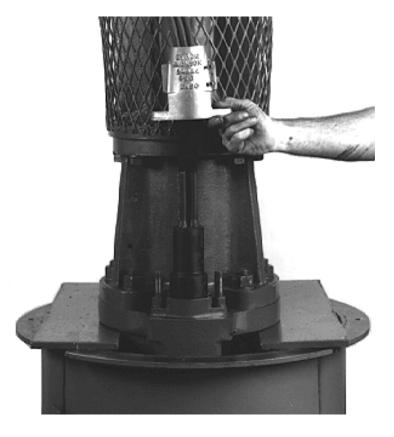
Molded Plug installed and slide clamp to fit over molded plug
